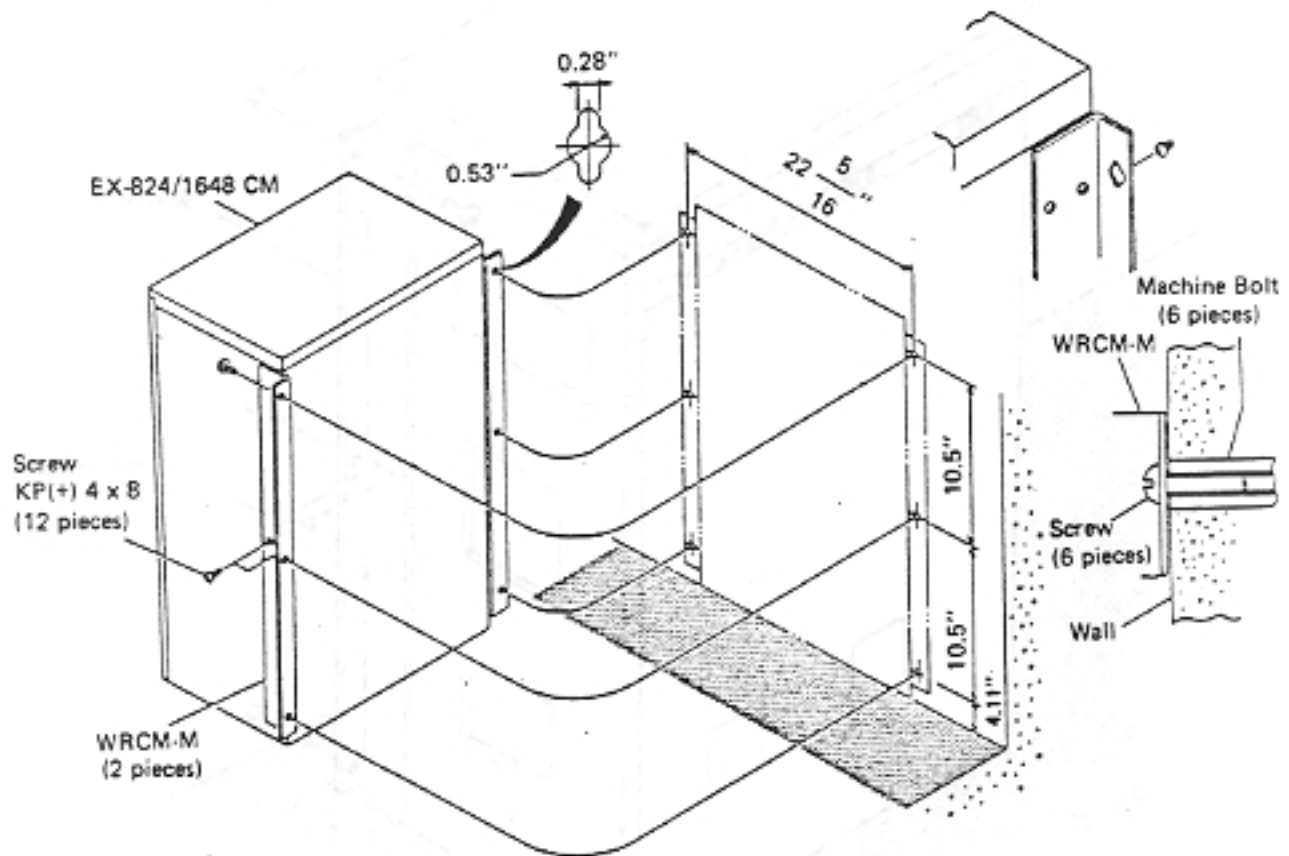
(2)(a)A EX-824/1648CM Wall-Mounting Method
